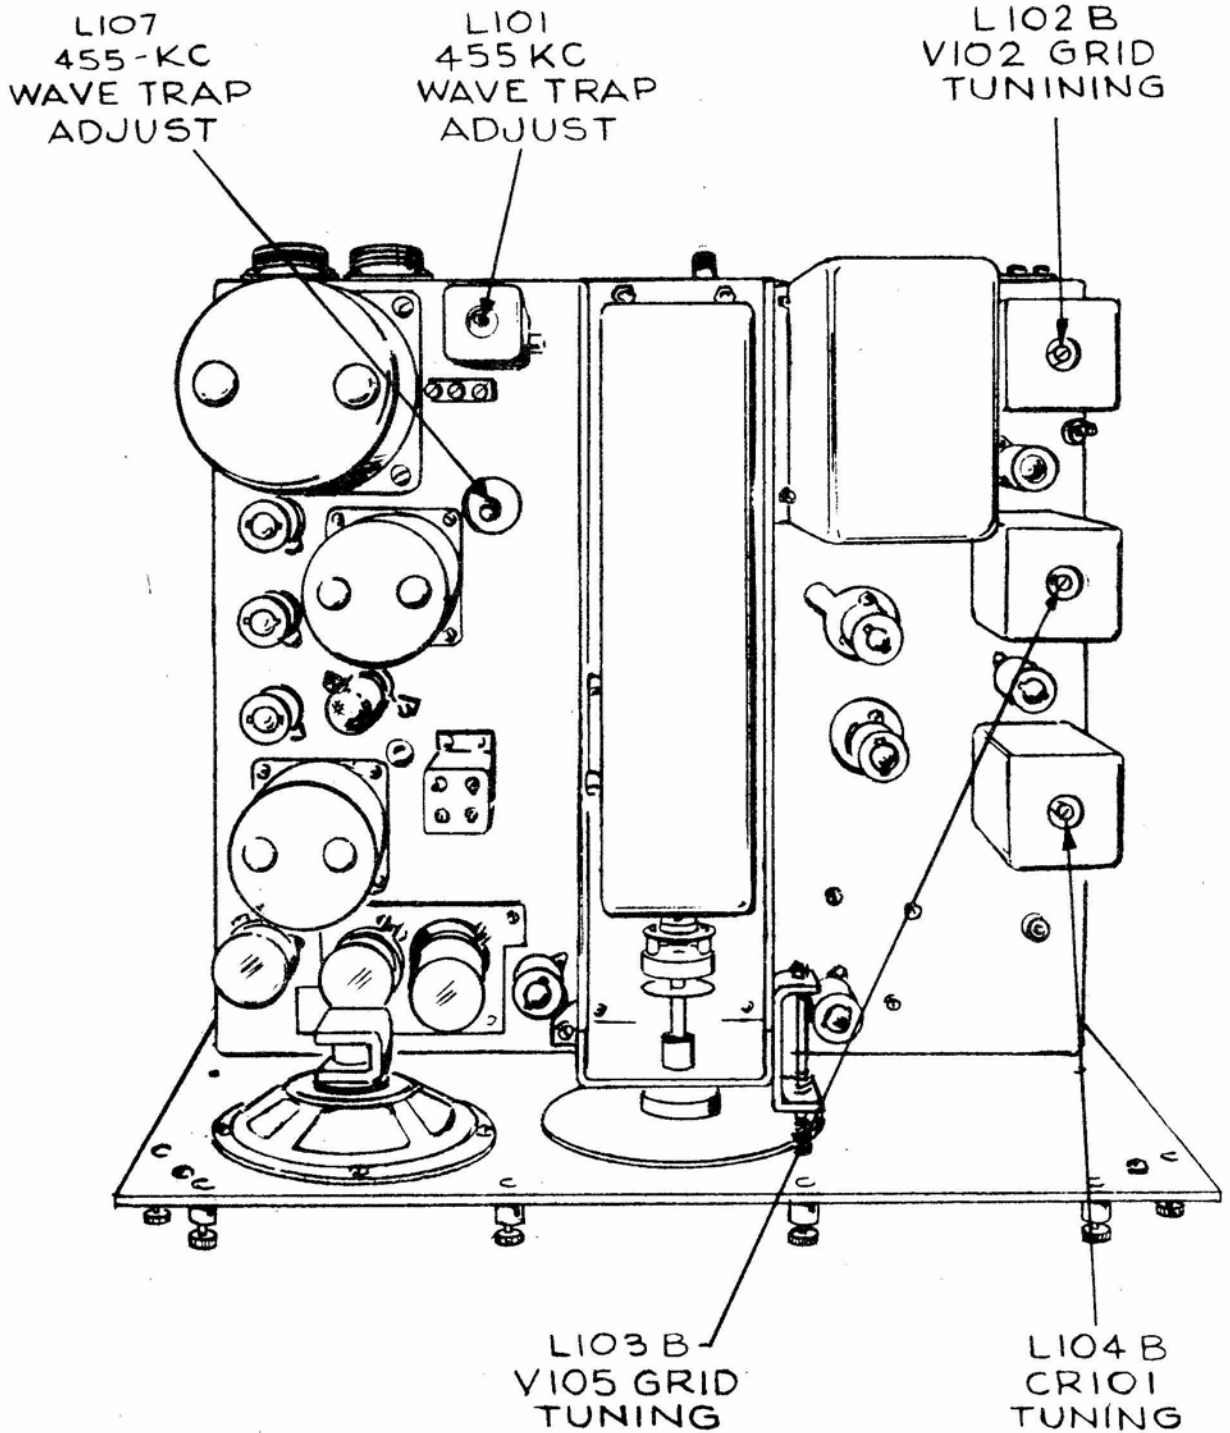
Alignment Adjustment Locations, Receiver Chassis Top View
